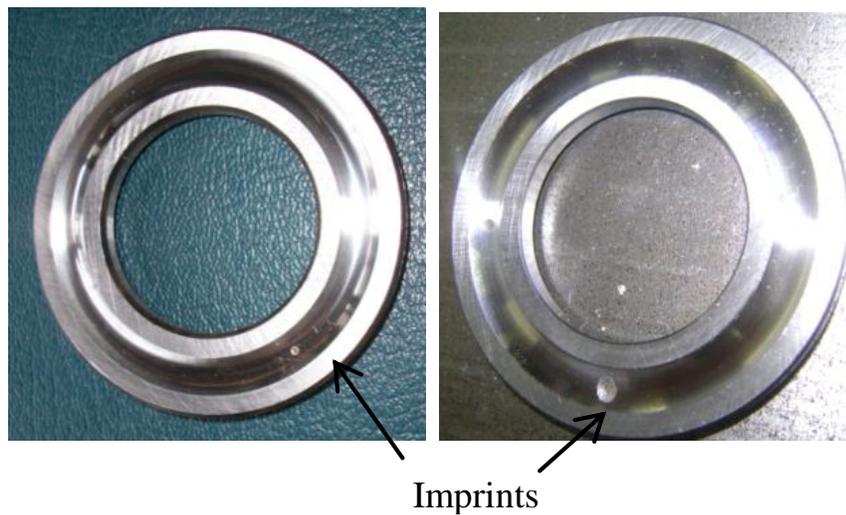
Spalling defect on a thrust ball bearing.
